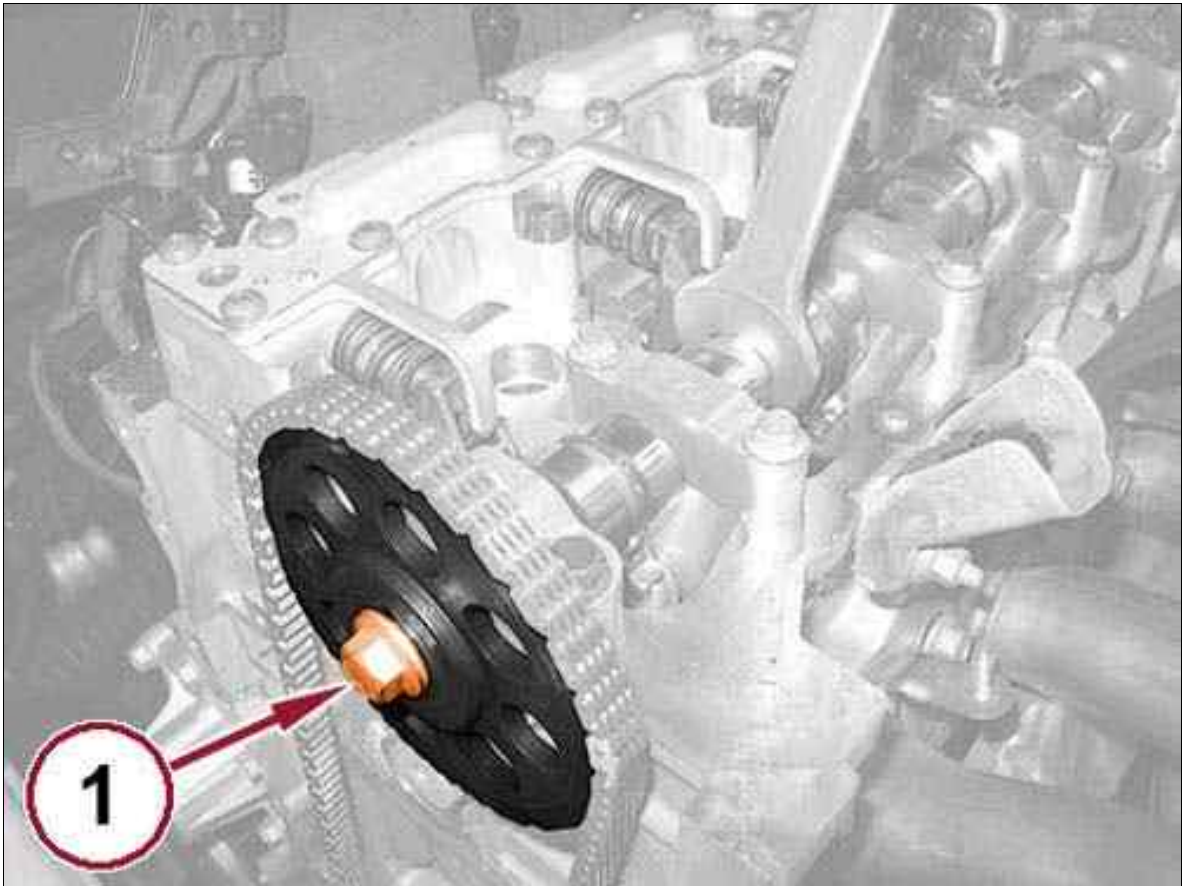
Positioning Camshaft Centering Pin At "12" O-Clock Position & Marking Chain Link At Point Marked On Camshaft Sprocket
